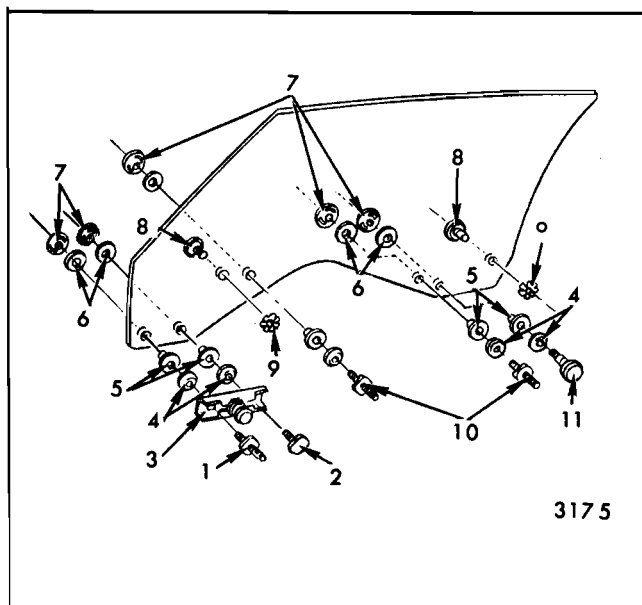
Front Door Window Assembly "A-37, 67 and 87" Styles and "G-57" Styles
